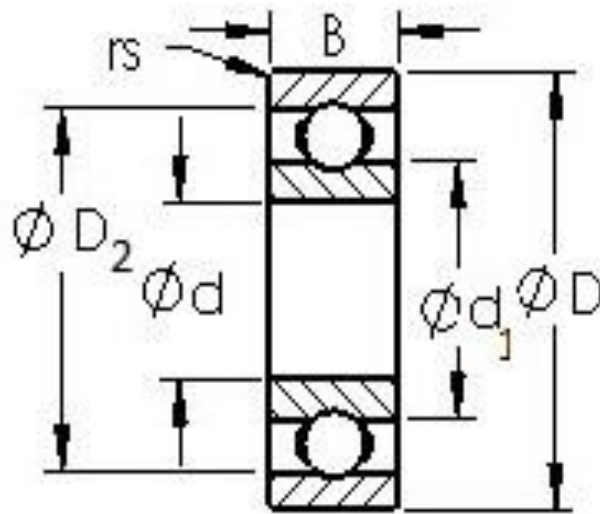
Geometry of ball bearing for particulate filled metal alloy composites
